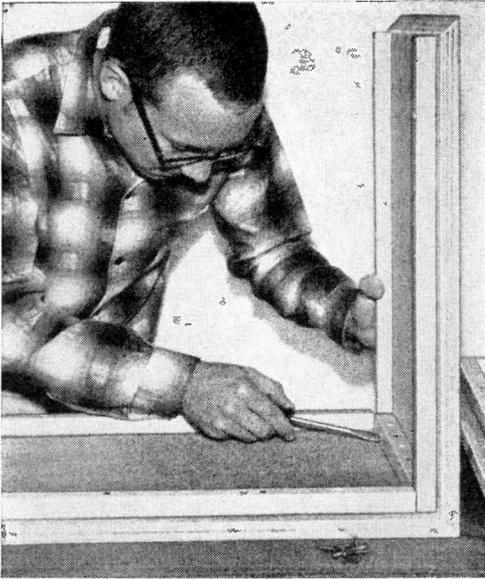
Attach all cleats and glue blocks; glue and screw together top, bottom, and sides of enclosure.
